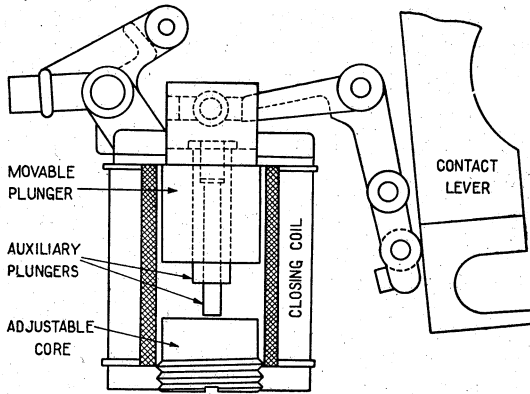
Sketch of closing mechanism for large pattern high-speed breakers.
